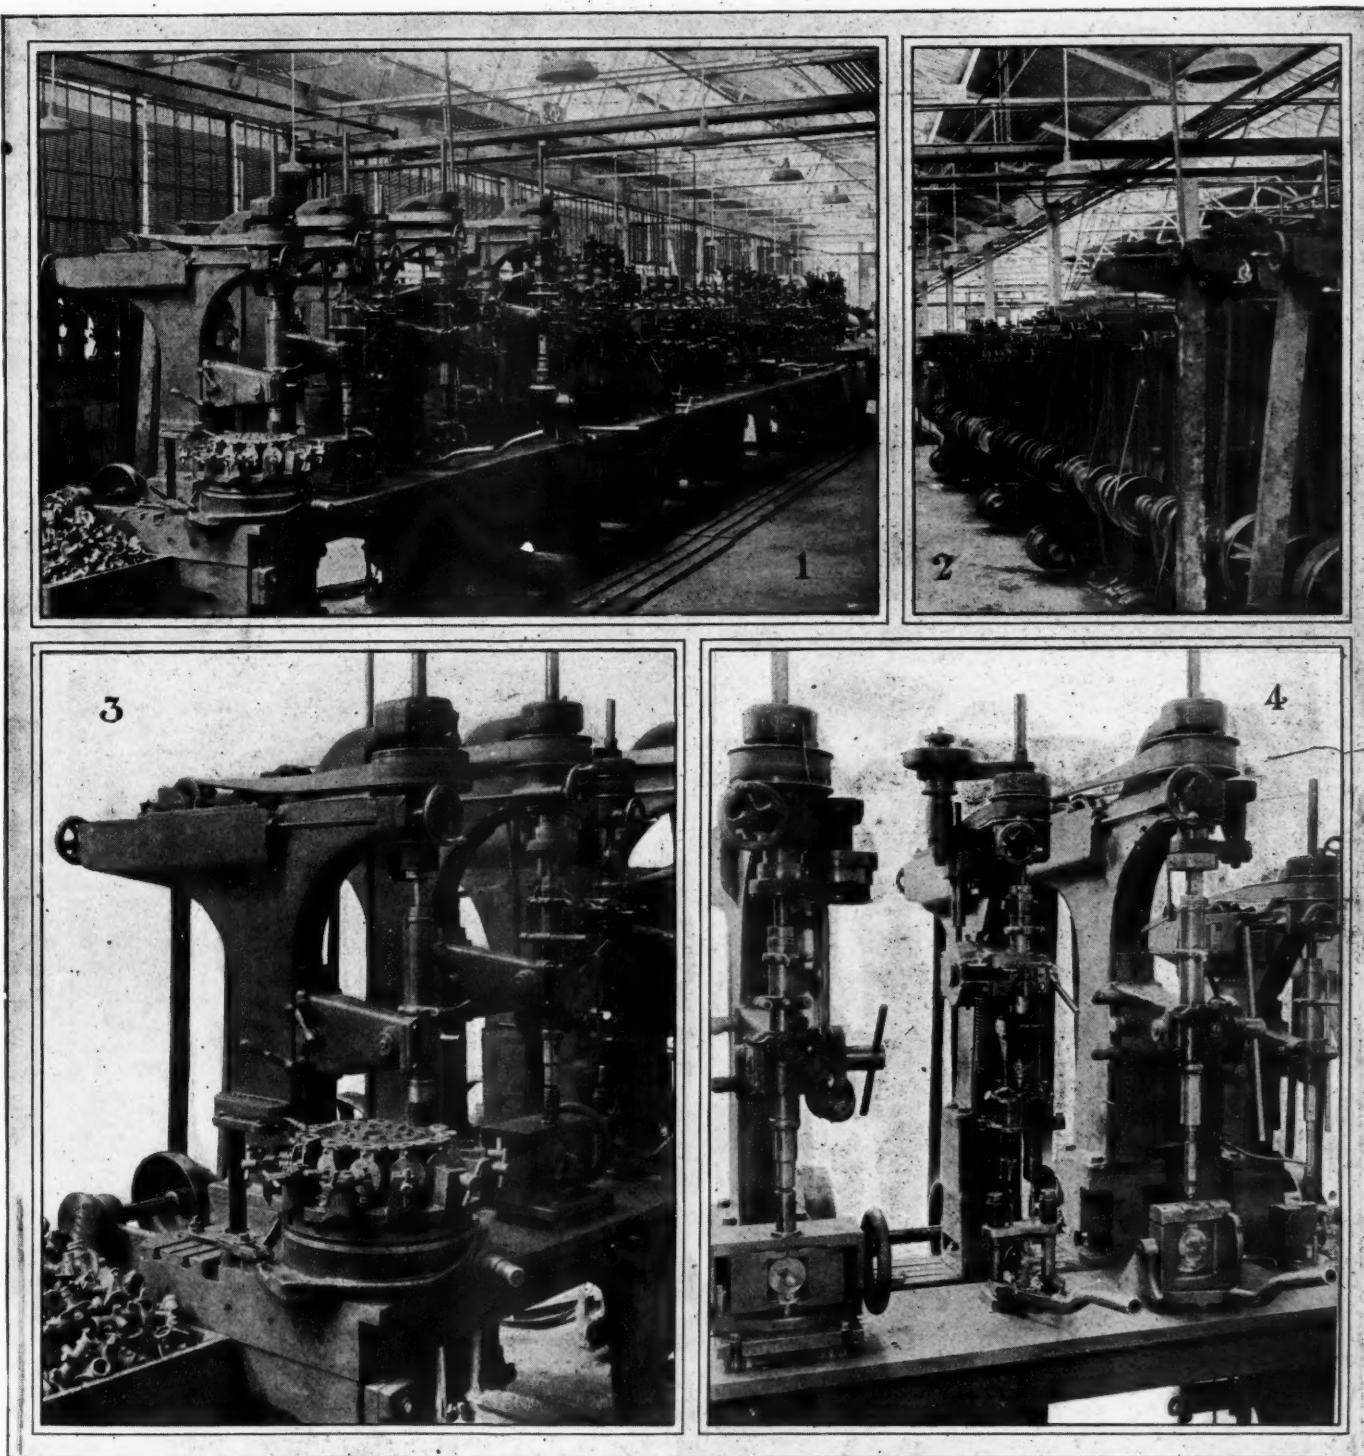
Single table unit at Holley Manufacturing Co. capable of turning out 150 mixing chambers per hr. This unit is 50 ft. in length and takes care of thirty-six operations with twenty-one men. It is equipped with standard Avey drill press heads capable of being moved along the table to suitable positions for manufacture. Fig. 2—Back of Holley drill head installation, showing power drive. Shaft is provided with keyway to allow pulleys to be shifted along the line to accommodate the positions of the drill heads. Fig. 3—Operations 1, 2 and 3. Milling fixture at end is a continuously rotating type from a Cincinnati milling machine holding twelve mixing chambers at a time. Fig. 4—Operations 2, 3, 4 and 5 in the manufacture of the Holley carburetor mixing chamber
